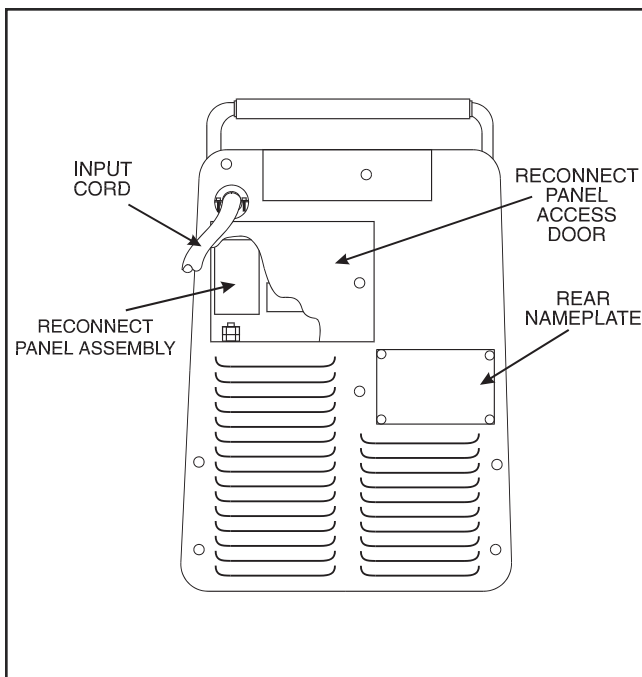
Case Back Assembly: Input Power Cable Entry Connections.
